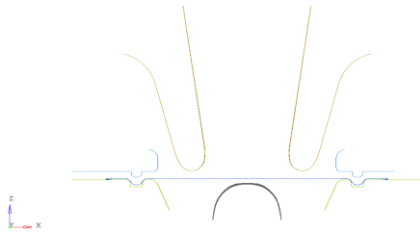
Fig. 1 Tools and blank initial position : Punch (brown), Blankholder (light-blue), Lower Tool (green), shim4 (black) and blank (dark-blue).
